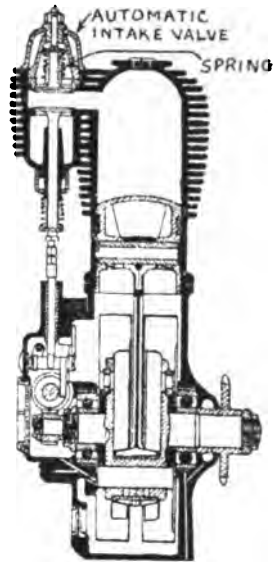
Automatic Inlet Valve. Suction of piston draws the valve open against the tension of spring. Exhaust valve mechanically operated.
